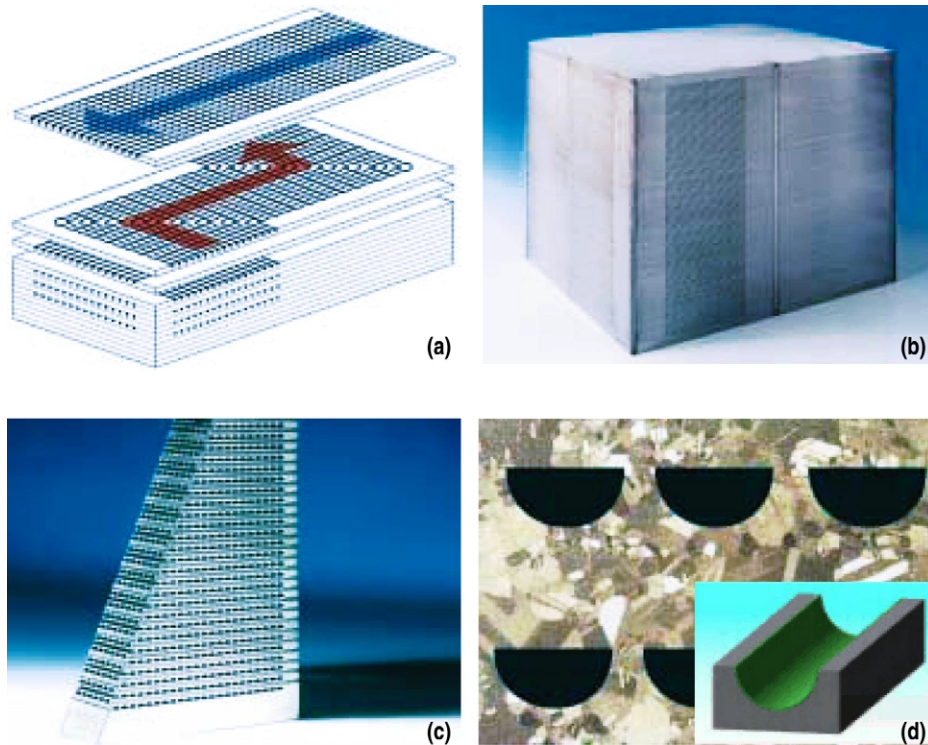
PCHE reactor. (a) Plates with etched flow paths are stacked to form countercurrent flow paths in final exchanger and diffusion bonded to form monolithic heat exchanger. (b) PCHE prior to attachment of headers by welding. (c) Section of PCHE showing. (d) Metallographic section of PCHE showing extent of diffusion bonding with insert showing catalyst deposited on the wall of the flow channel. Note: The flow channel is approximately 3 mm wide.
